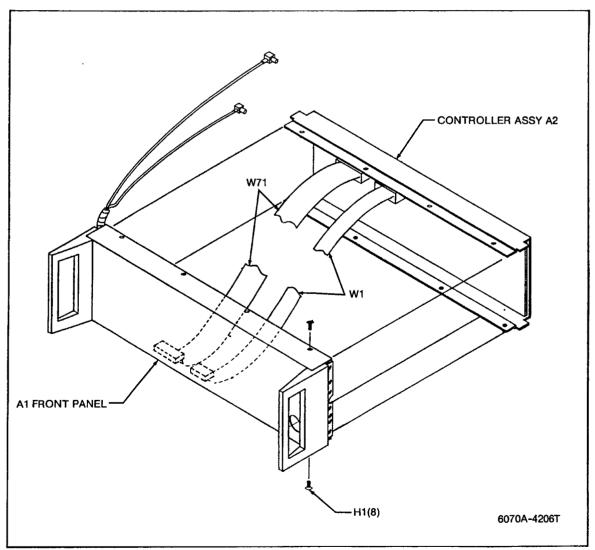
A1/A2 Front Panel and Controller Assembly
